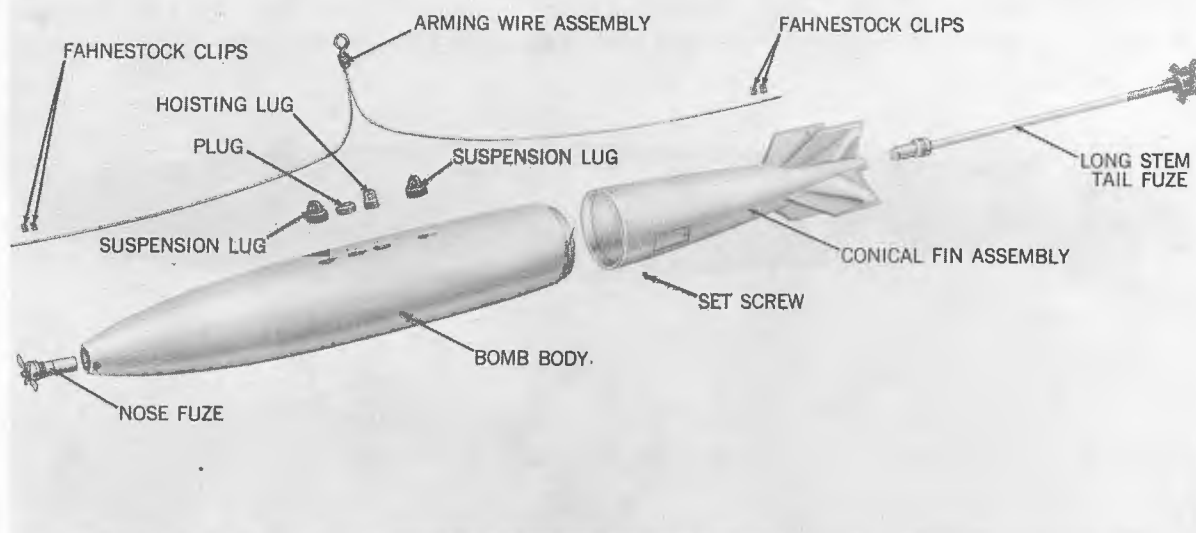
1000-lb Low-Drag Bomb (GP) Mk 83 Mod 3 (Mechanically Fuzed), Exploded View.
